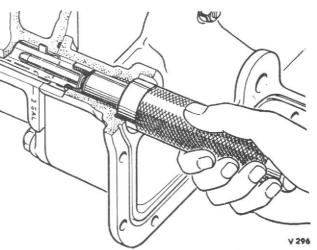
Inserting the sight glass seating into the wheelcase using tool T74769
